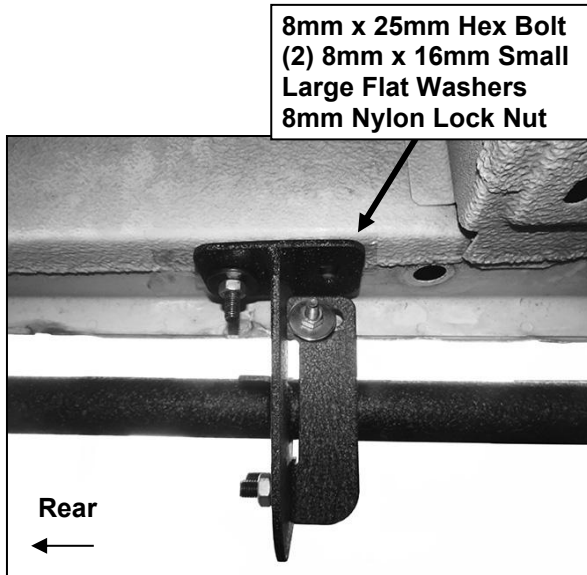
Attach Support Brackets to back of pinch weld (driver/left front and #2 Brackets illustrated)
